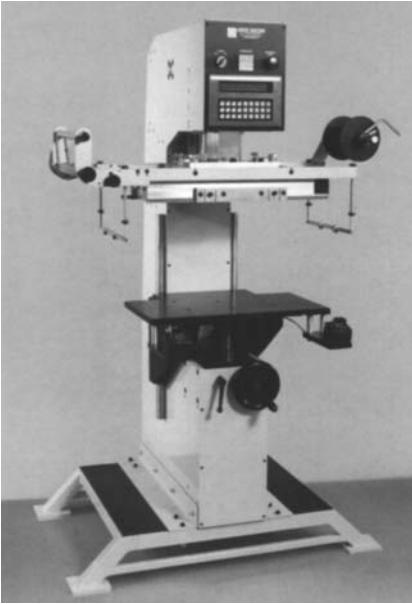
Typical hot stamp machine. (Courtesy United Silicone, Inc.)
